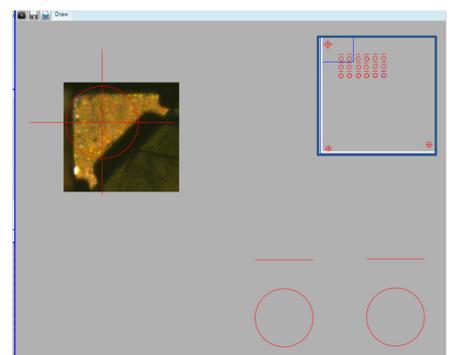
CAD drawing of the testing surface within a BGA device. The inset shows the whole area within the fiducials. The large image is an enlarged view of the blue square within the inset showing BGA ball positions, tool positions and an optical image of one of the fiducials.
